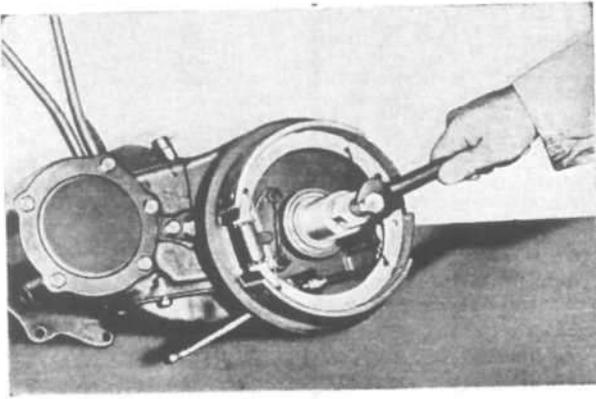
OUTPUT SHAFT OIL SEAL PULLER
